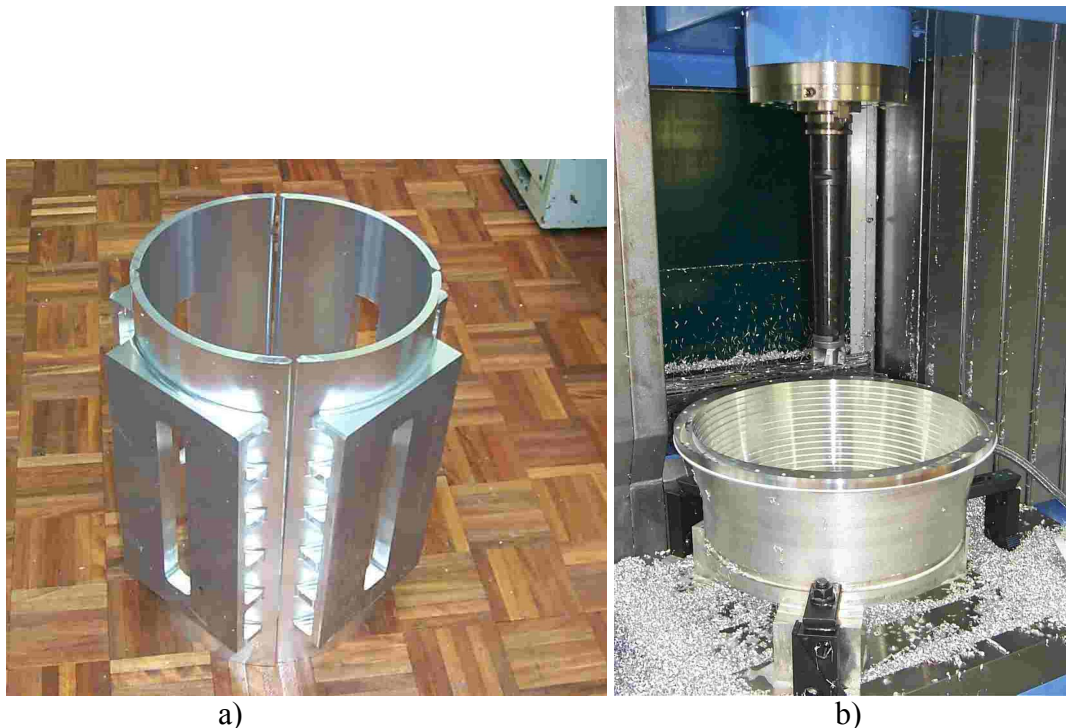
a) View of the outer-coaxial (LF-band) structure with its 6-ports network before welding, b) Stepped transition of the horn being machined on CSIRO's new CNC Machining Centre.
